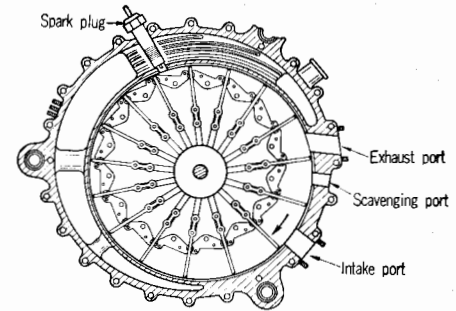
Rotary engine by Mallory Co. (mechanism)
